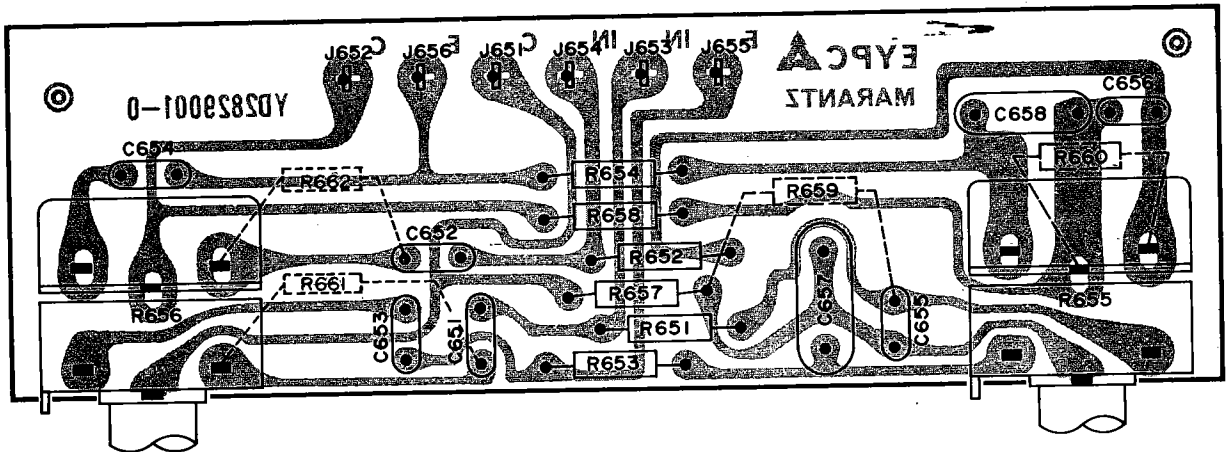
Tone Control Volume Unit Assembly P650 Component Locations
